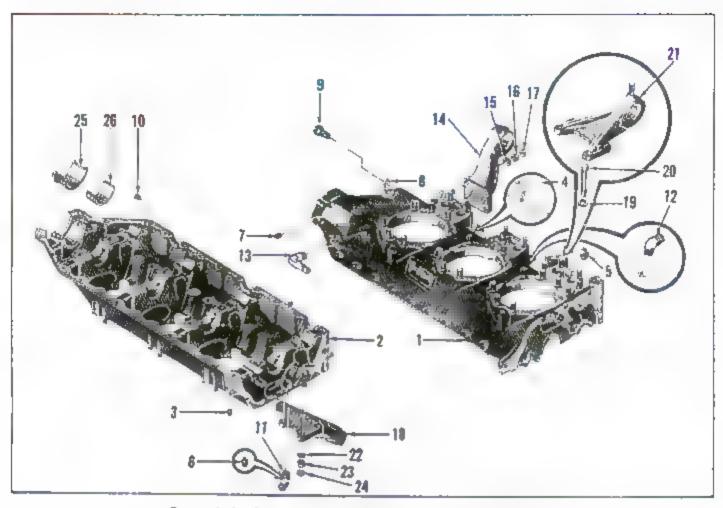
Crankcase Subassembly Procedure (Sheet 1 of 2)
